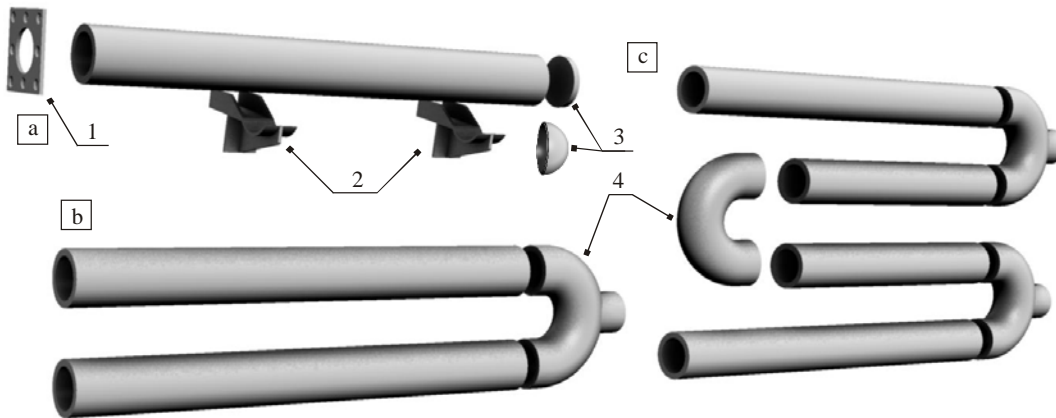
Radiant tubes: a) single-segment type, b and c) two and four-segment type [5]; 1 - element used to attach the tube to the housing of the working chamber, 2 – tube support, 3 – element closing the tube, 4 - elbows linking individual tube members; material: GX40NiCrSi35-17 or GX40NiCrSiNb38-19
